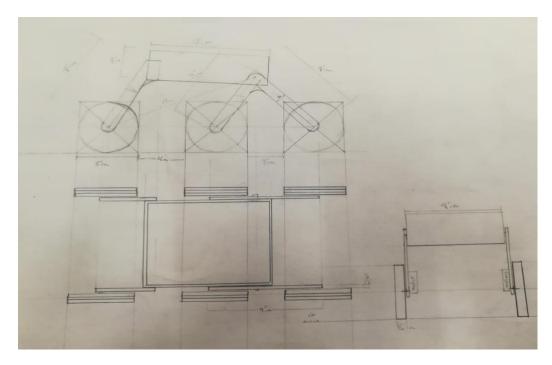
Side, front and top view of Preliminary Technical Sketch
